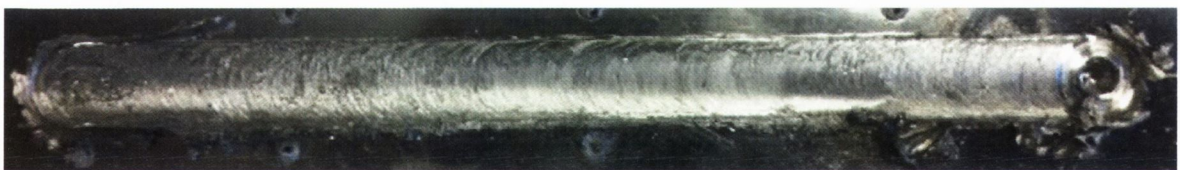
Weld fabricated at 500 mm/min and 1400 Rpm
